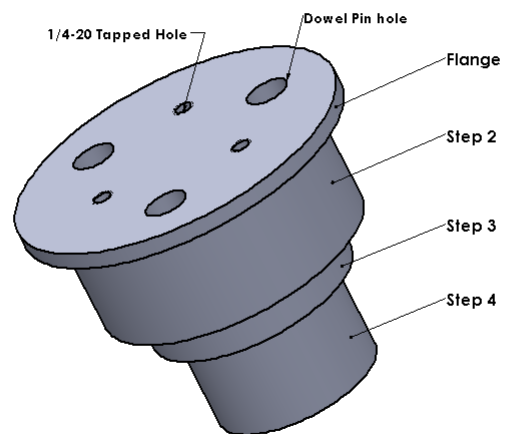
Drawing showing the shaft that helps in torque transmission between the motor and the rotating system
